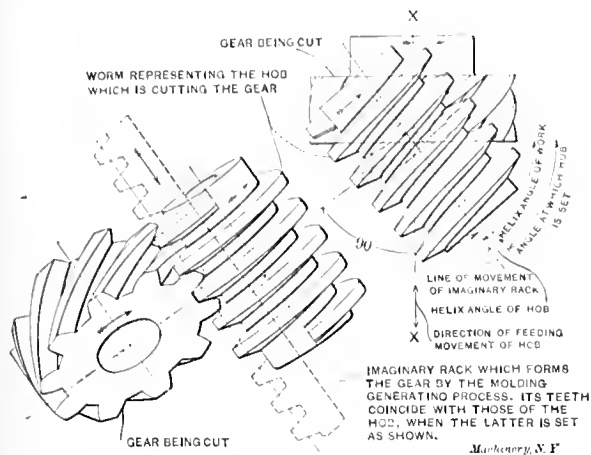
Molding-Generating Method of Cutting Spiral Gears, as Exemplified in the Hobbing Process; compare with Figs. 50 and 94.
